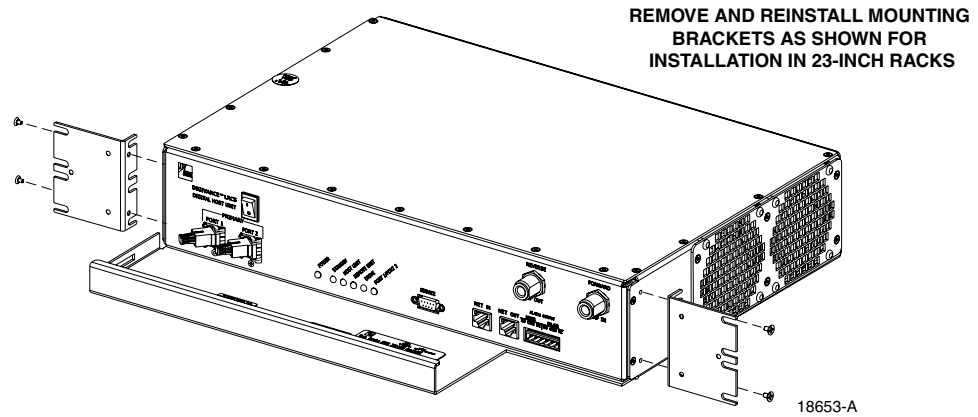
Installing the Mounting Brackets for 23-Inch Rack Installations
